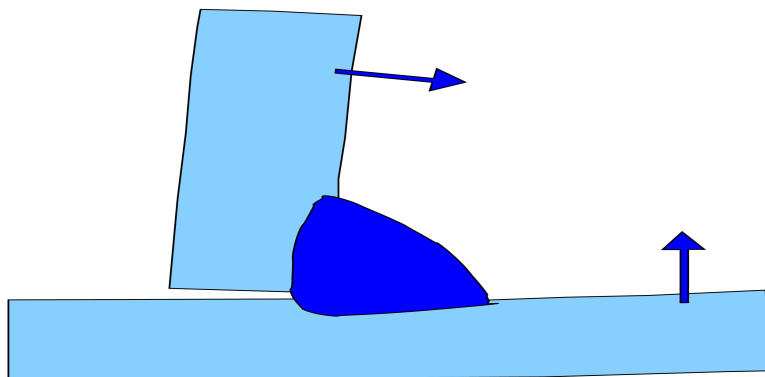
The geometrical form of the fillet weld after cooling down.
